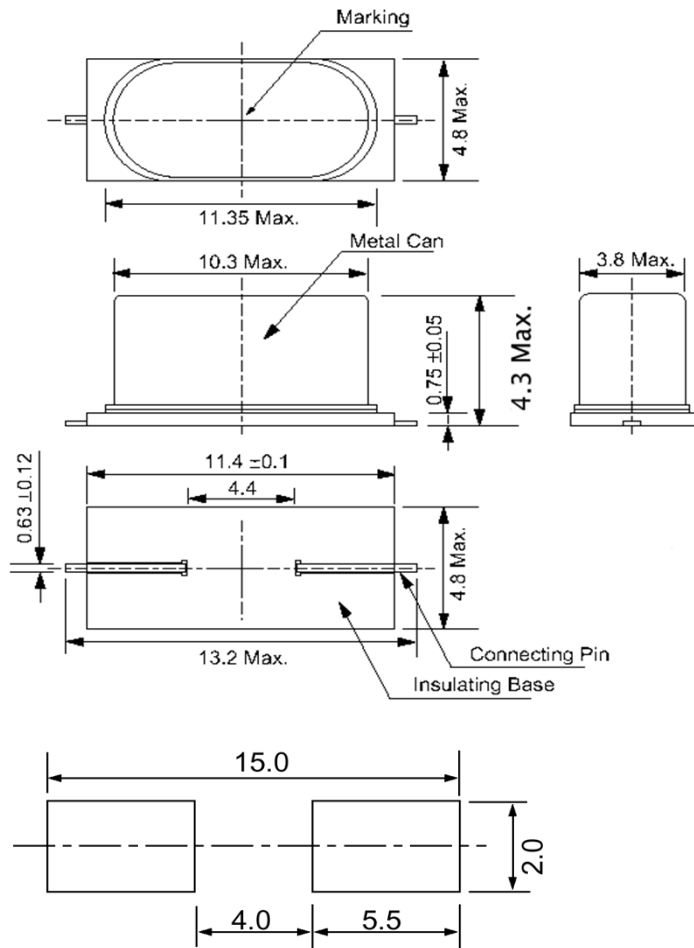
Top, Side, Bottom, End Views and Land Pattern
